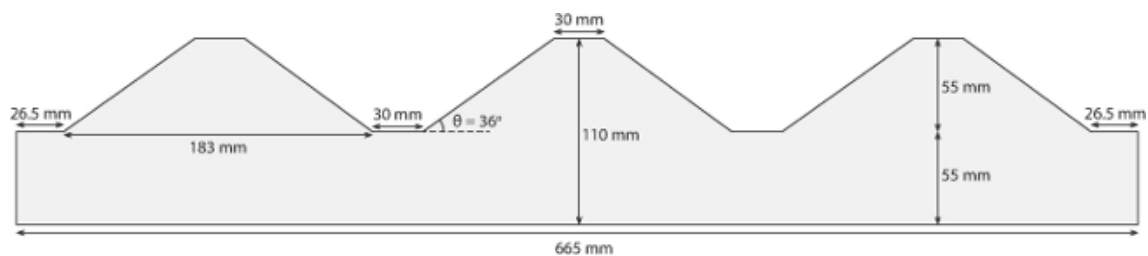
Dimensions of the mylar sheet described in step 3.2.10. [Please click here to view a larger version of this figure.](#)
